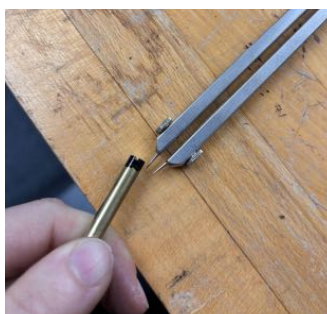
Marking the height for the replacement screw head, cut with a jeweler saw.
